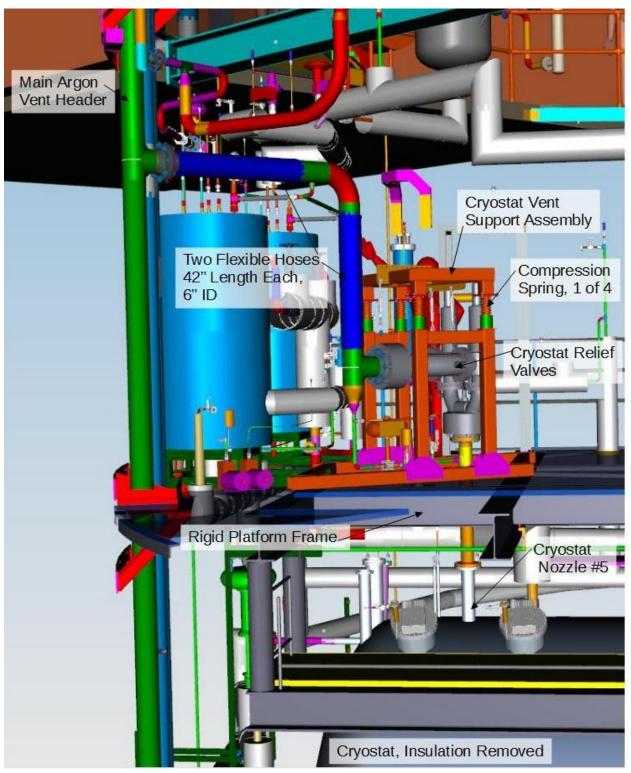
View of the supports of the Cryostat relief valves and diverter valves.
